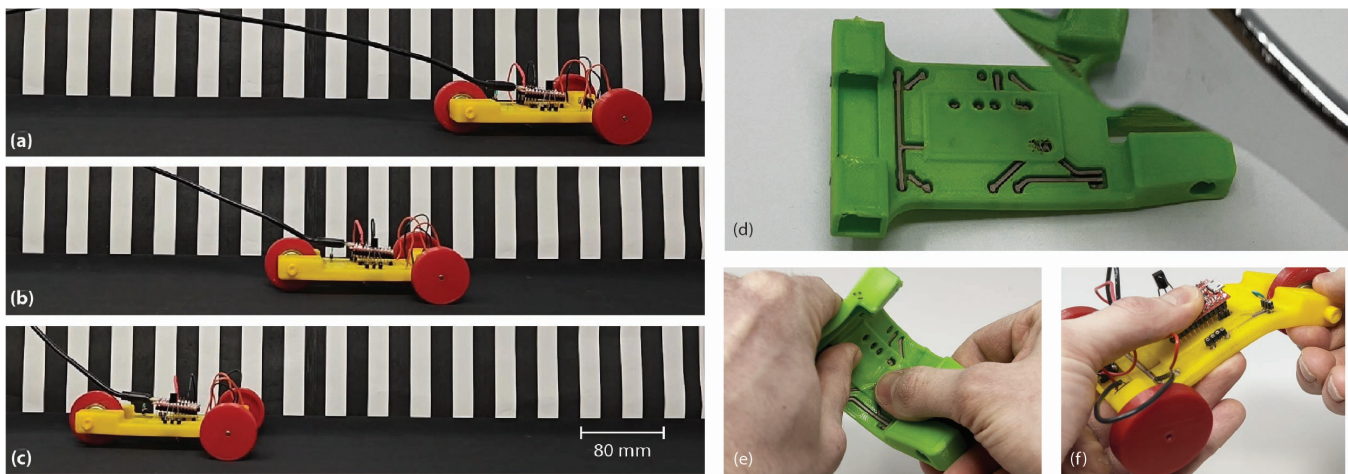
Soft wheeled robot demonstrations. Wheeled soft robot translating uni-axially, powered by a USB cable only. Timestamps at (a) 0s, (b) 1.6s, and (c) 3.6s. (d) Printed robot body with embedded circuitry being impacted by a wrench. (e) Printed robot body with embedded circuitry being bent. (f) Assembled robot body undergoing flexure.
